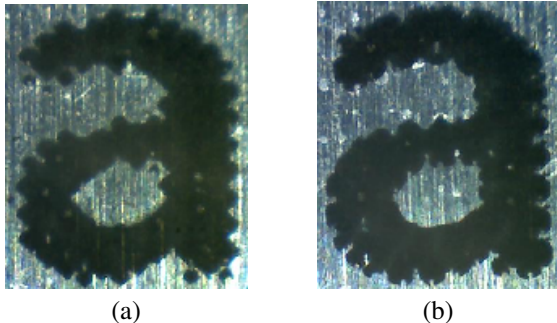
A sample of letter 'a' printed using a cylinder engraved a) electronically and b) chemically. Both cylinders were engraved using the same artwork.
